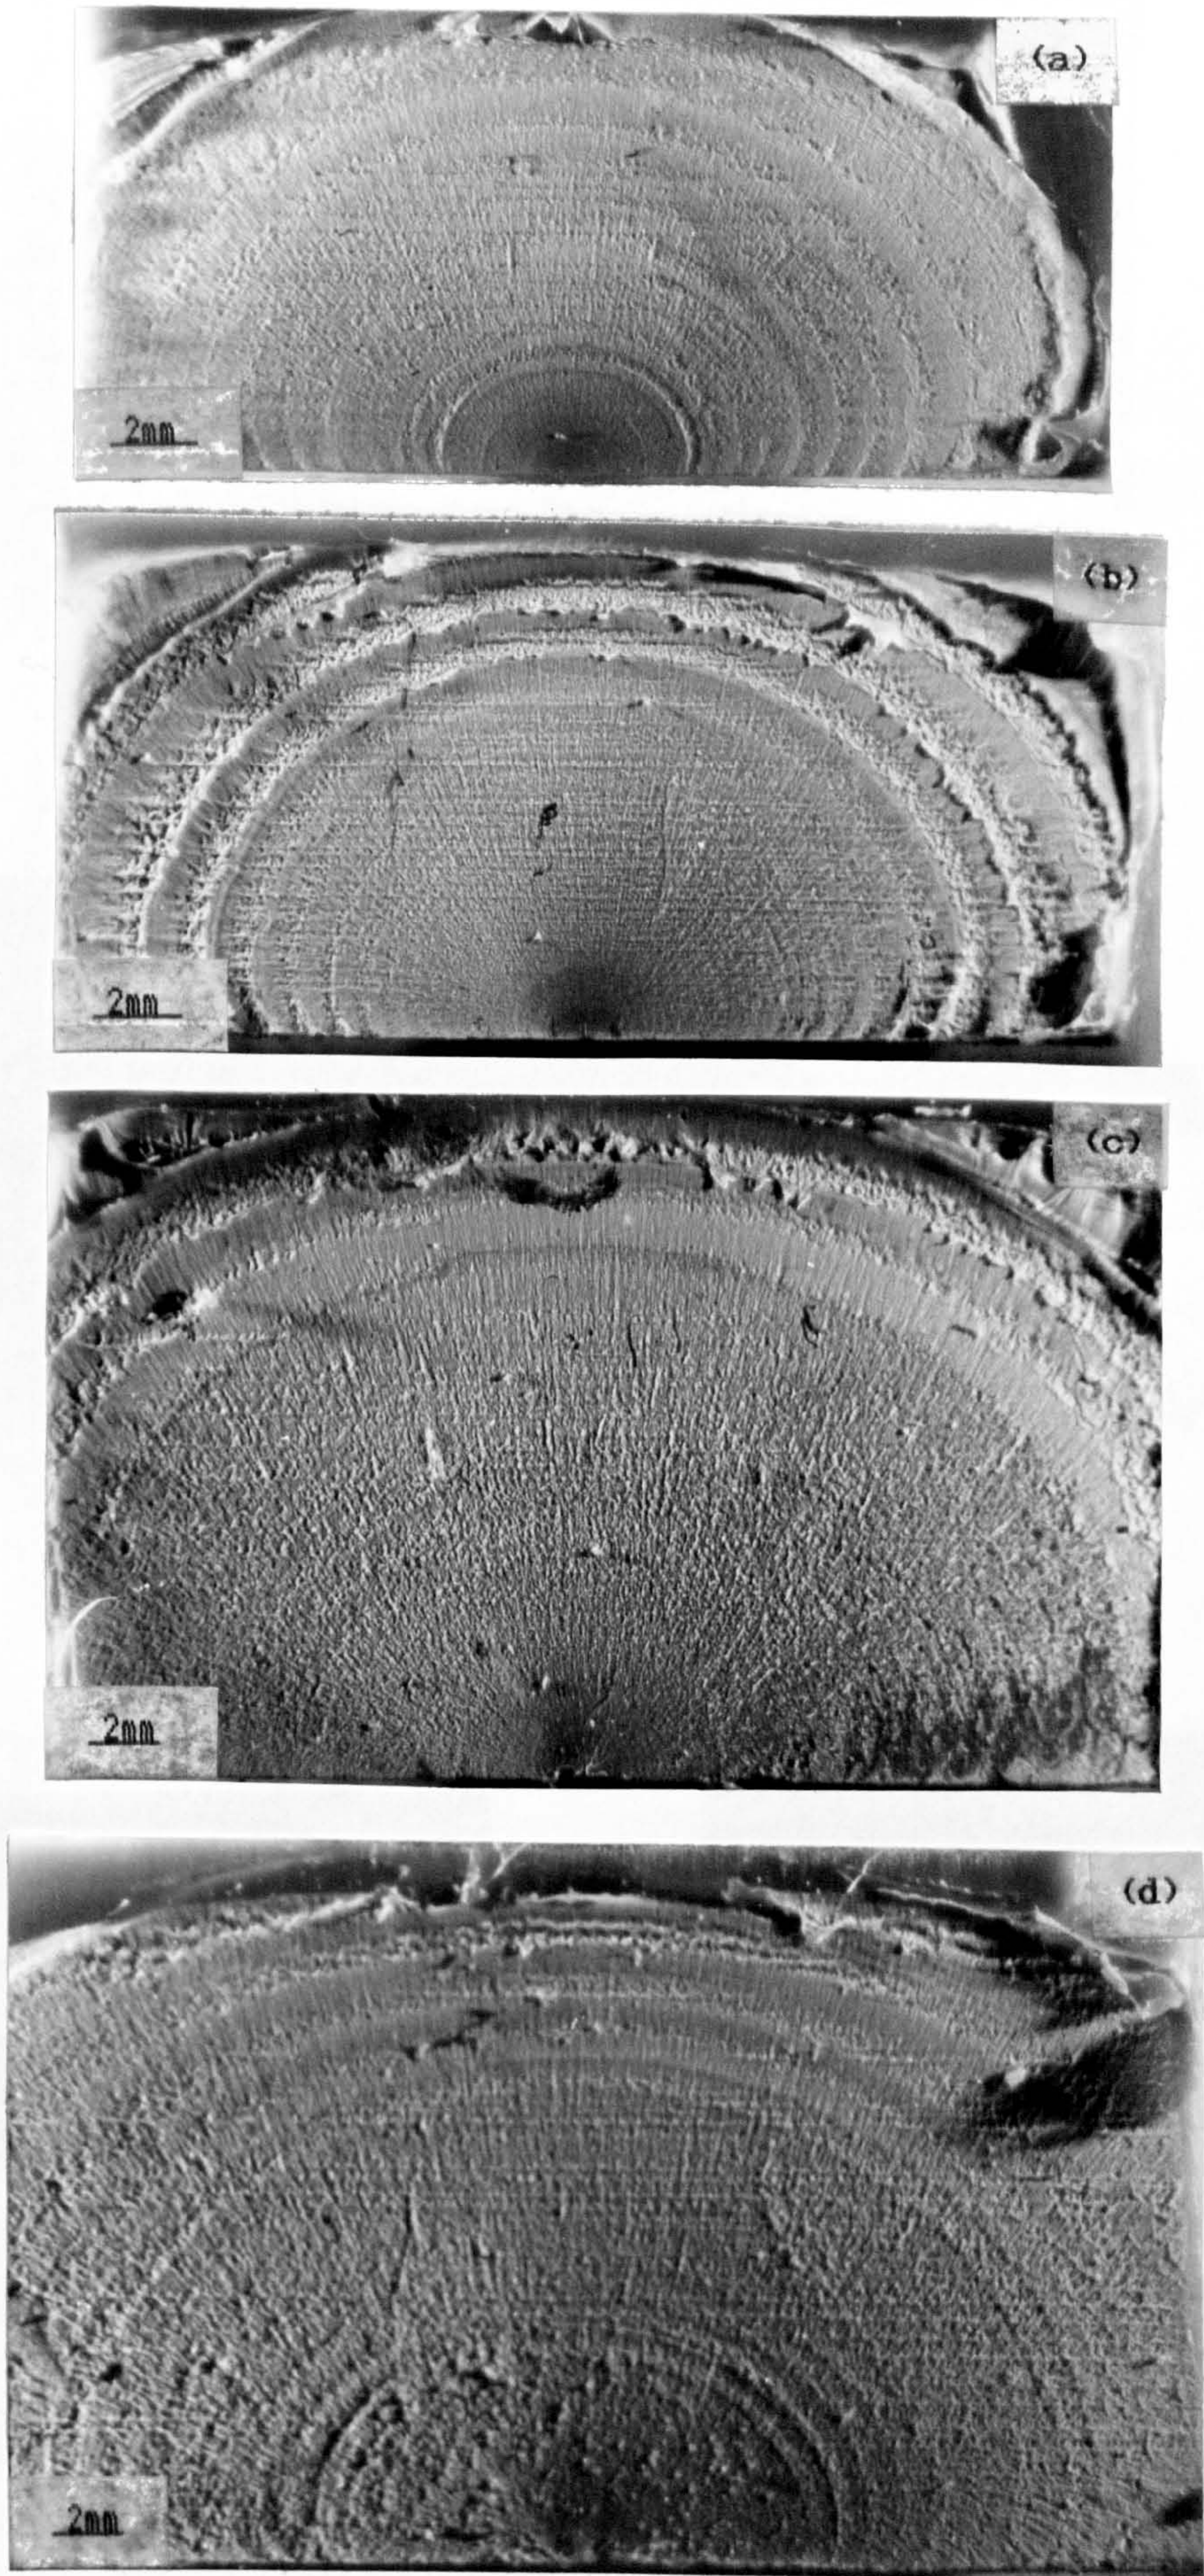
Fracture surfaces of pipe failures (a) and (b) in 63mm and (c) and (d) in 90mm SDR11 pipes tested at  $\Delta P=9.5$  bar.
